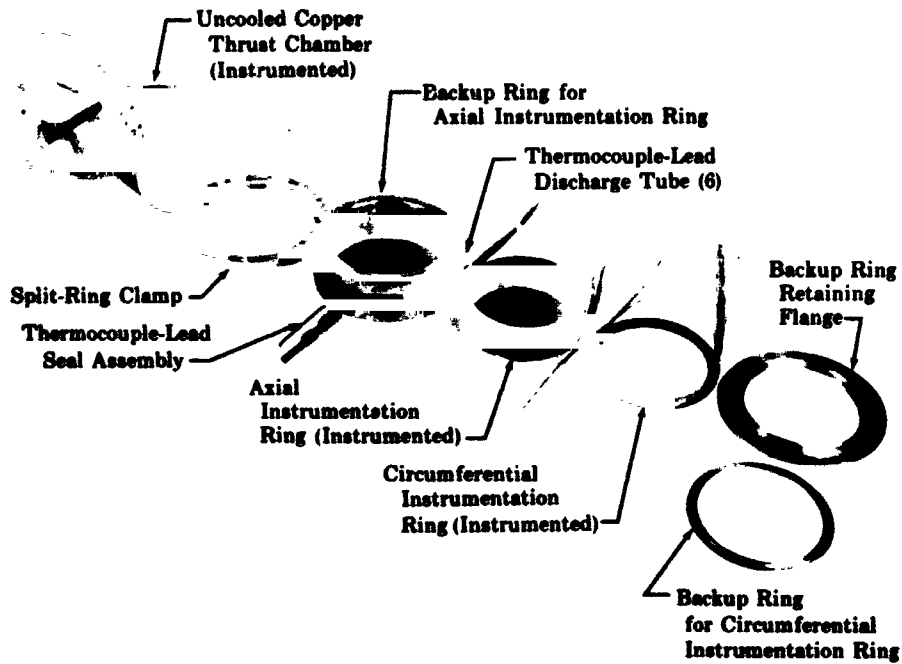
Exploded View of Uncooled Copper Thrust Chamber and Instrumentation Ring Assembly
